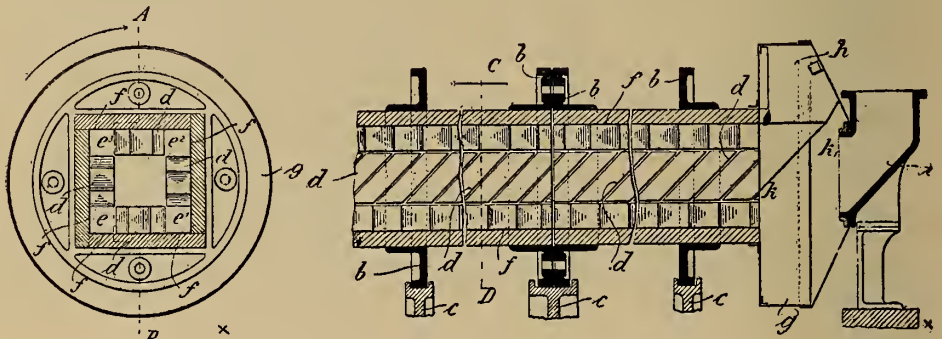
PERSPECTIVE VIEW AND PART SECTION OF SUESS TUBE CONVEYOR
